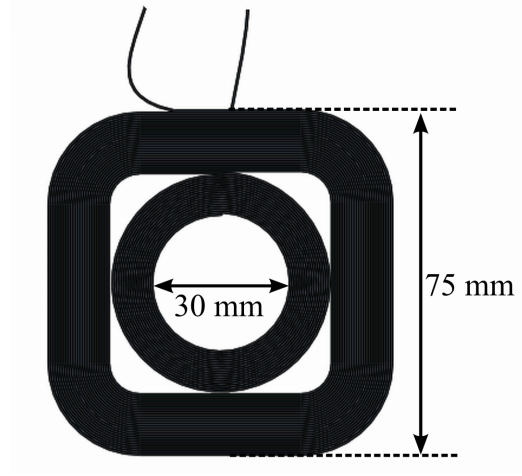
The outer squircle-inner circular coil structure used in measurements and geometrical sizes.
